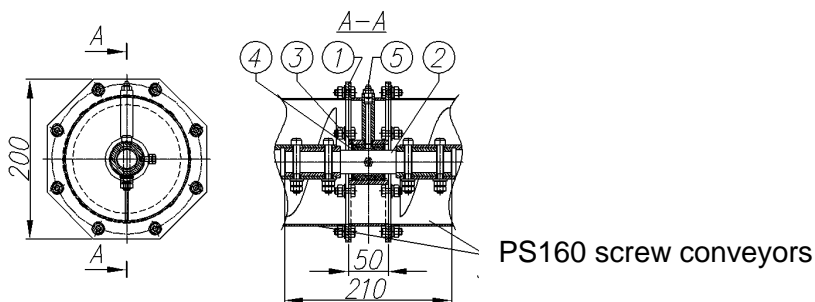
PS160-LOZ/P1-screw conveyor  $\varnothing 160\text{mm}$  – polyamide intermediate bearing
